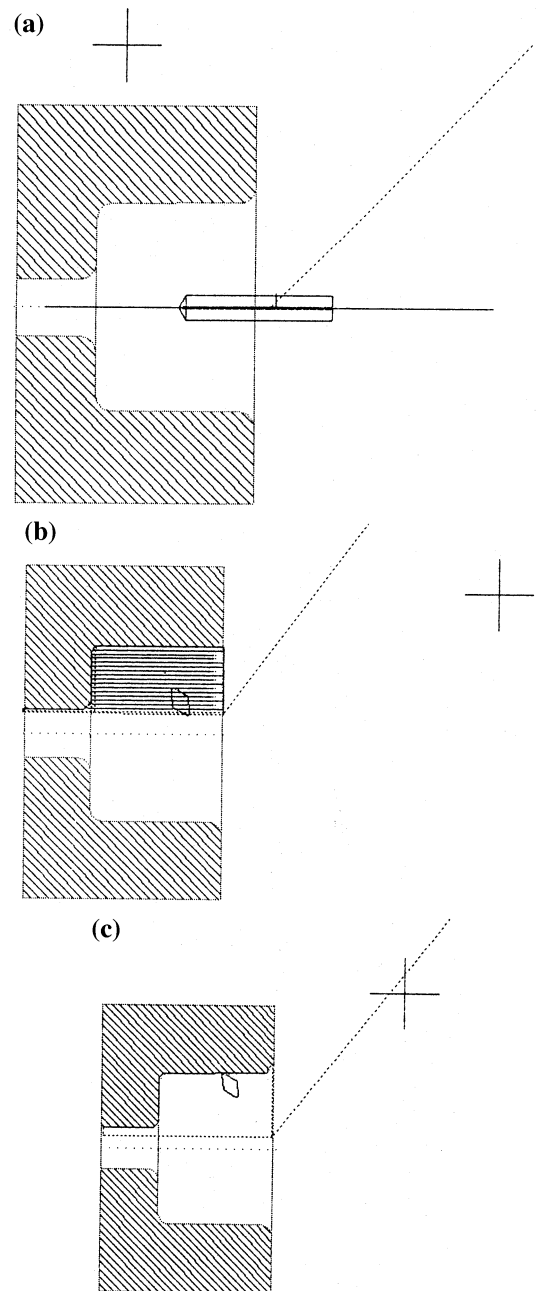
The generated tool path of the die for the final deep drawing process: (a) drilling with a CNC Lathe; (b) roughing with a CNC Lathe; (c) finishing with a CNC Lathe.
